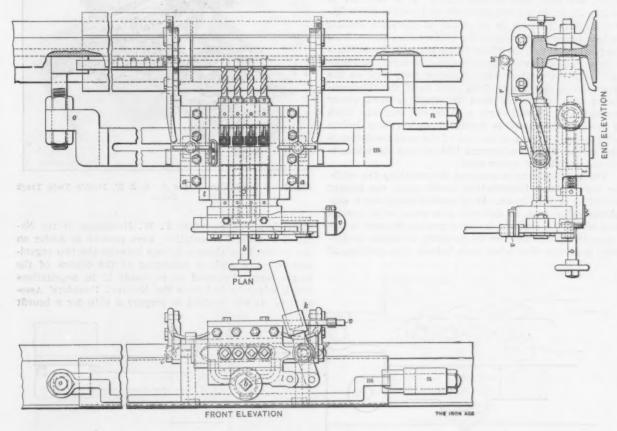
Plan, Front and End Elevations of the A. S. & W. Double Twin Track Drill.
